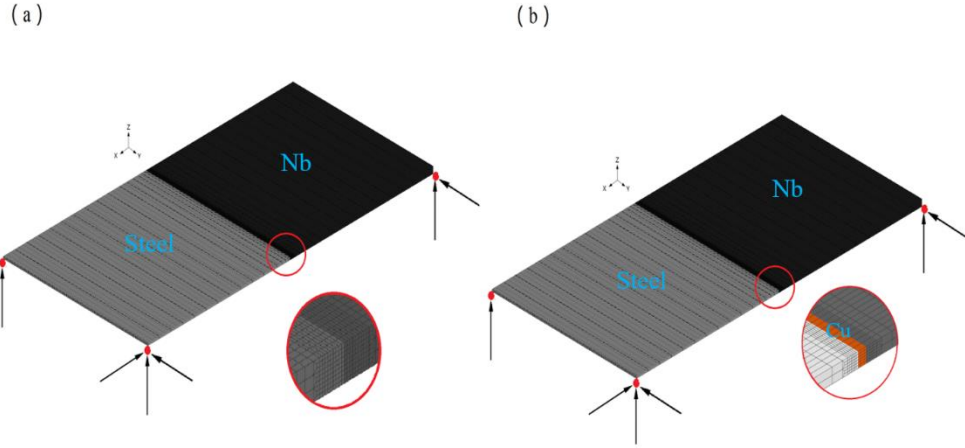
Mesh model and mechanical boundary conditions for welding (a) without and (b) with a Cu interlayer.
